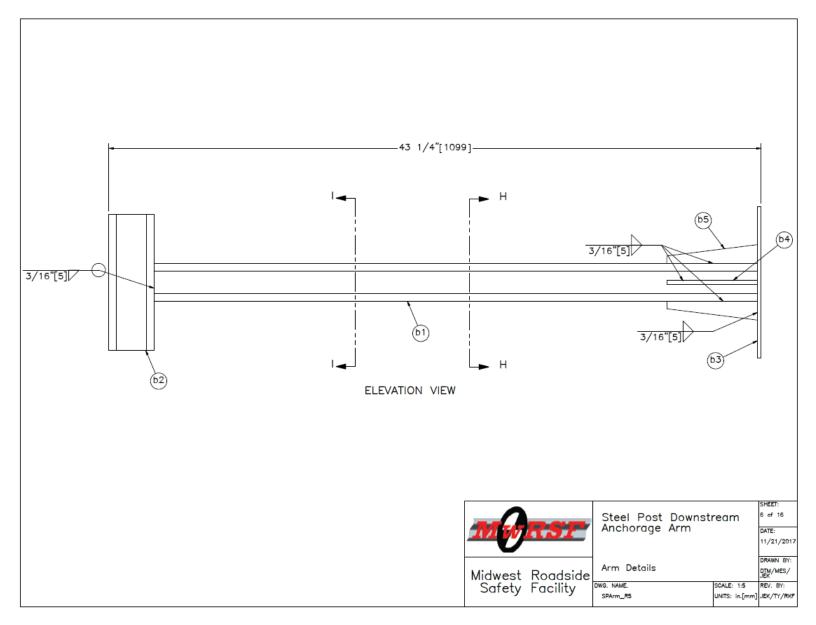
T-Shaped, Breaker Bar Design – Arm Details
